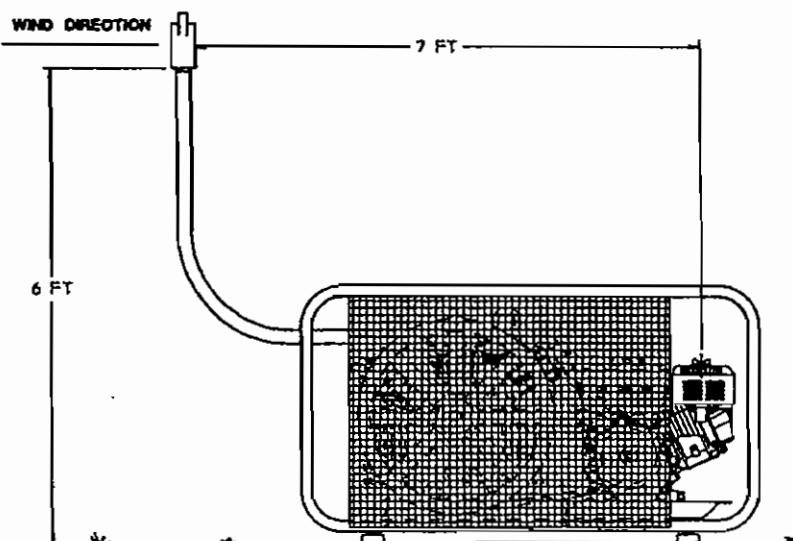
Locating the compressor prefilter of engine driven units² (C-G/DV shown)
